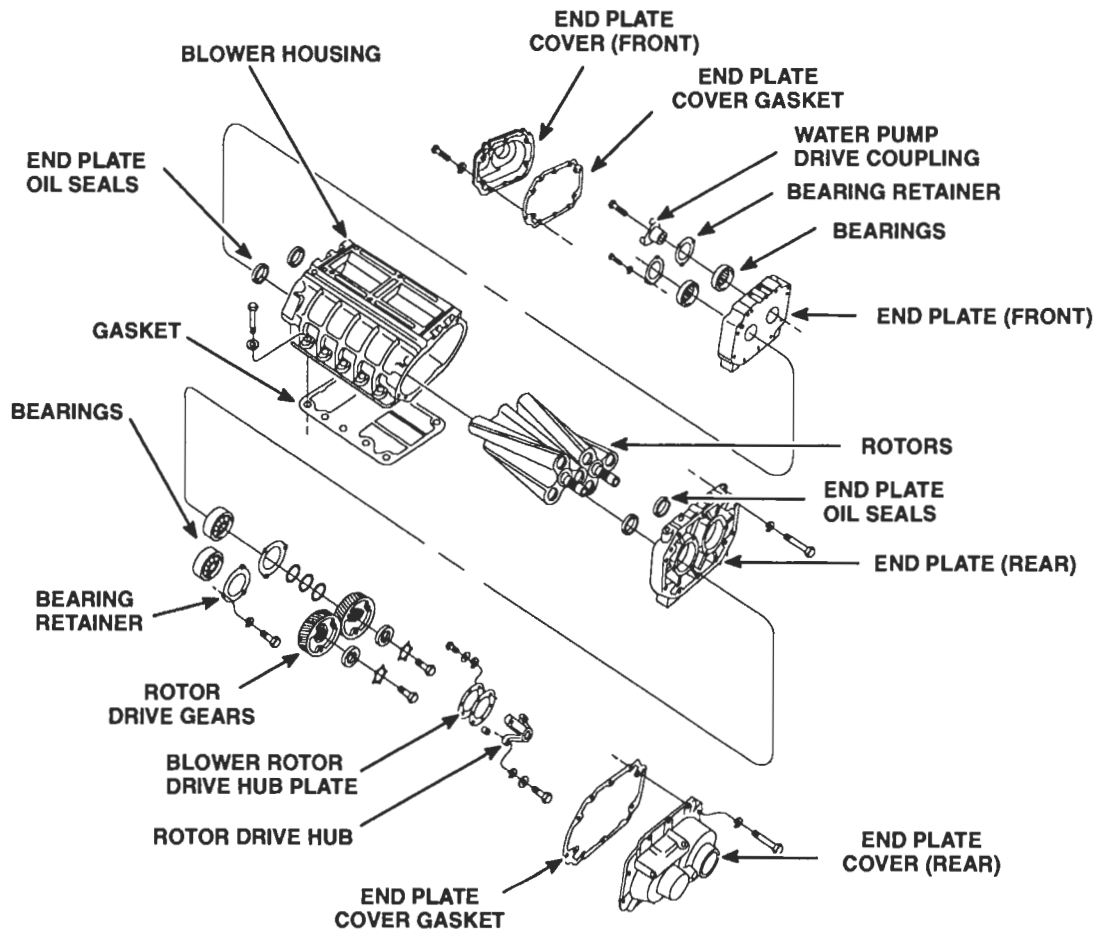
Former Reduction Blower Assembly (71E, 71N and 71T)
